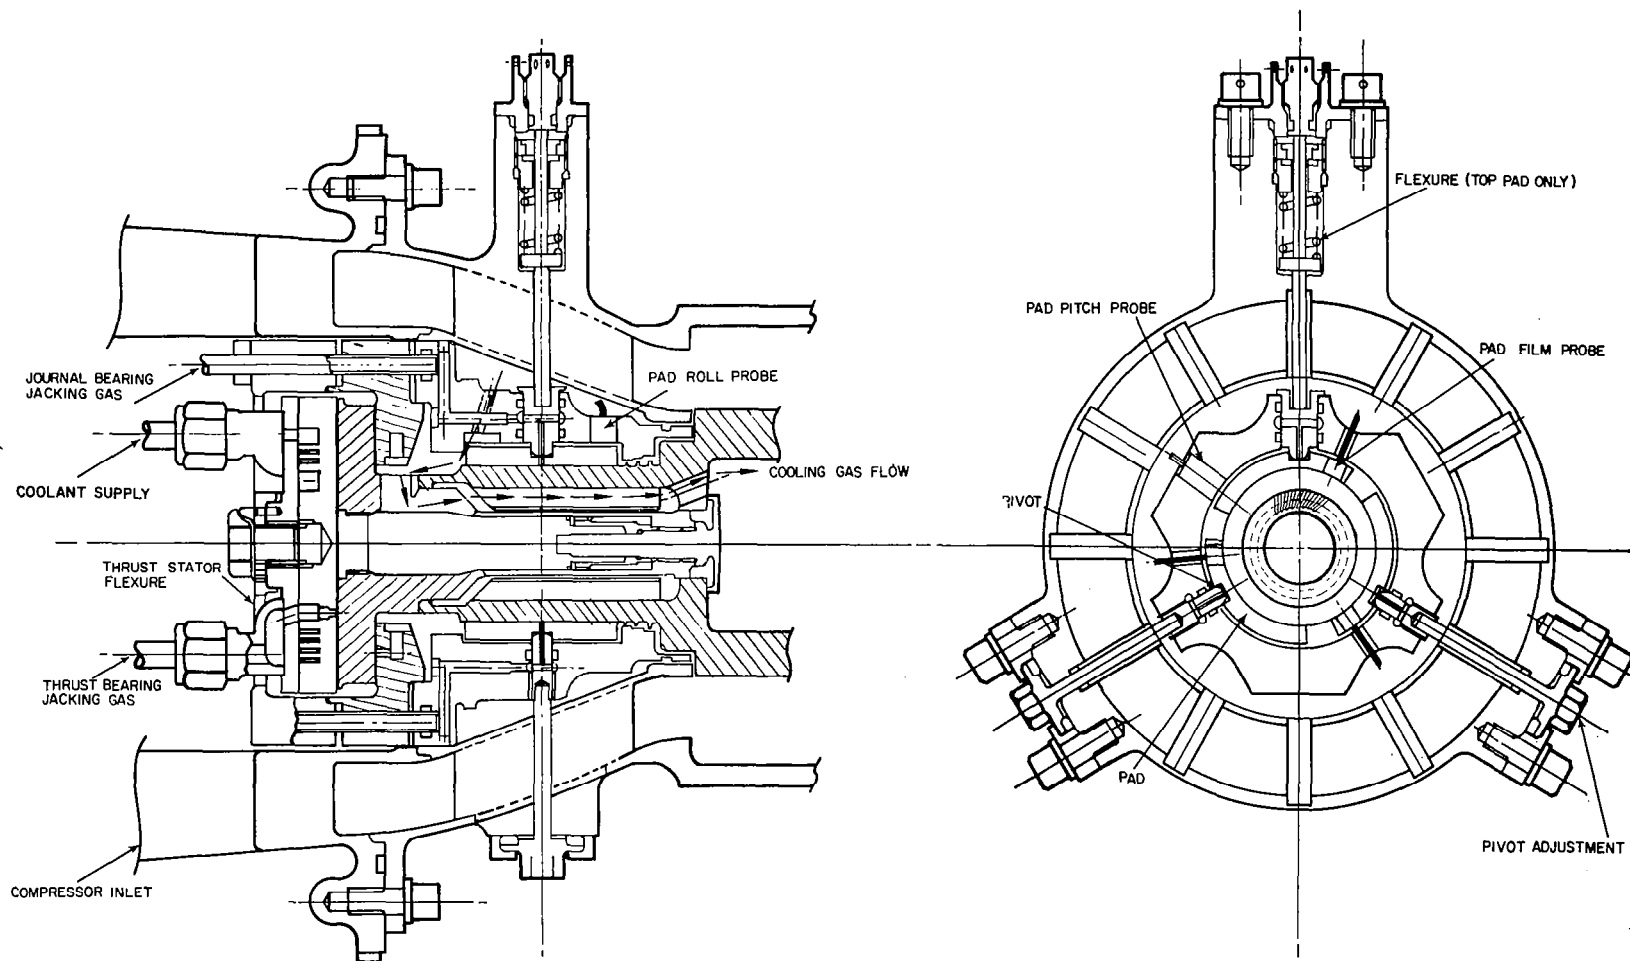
Turbine-Compressor Backup Gas Bearing Design. Thrust Bearing and No. 1 Journal Bearing
